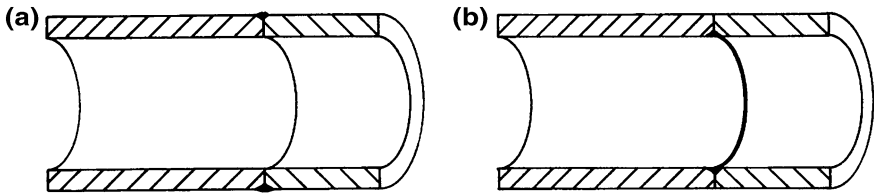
Cutaway views of welds between two tubes. a Weld on outside, crack on inside may cause virtual leak. b Weld on inside, no virtual leak
